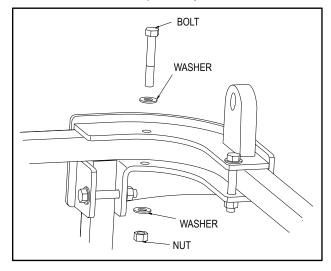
Bolt-On External Fall Arrest Cable Tension
